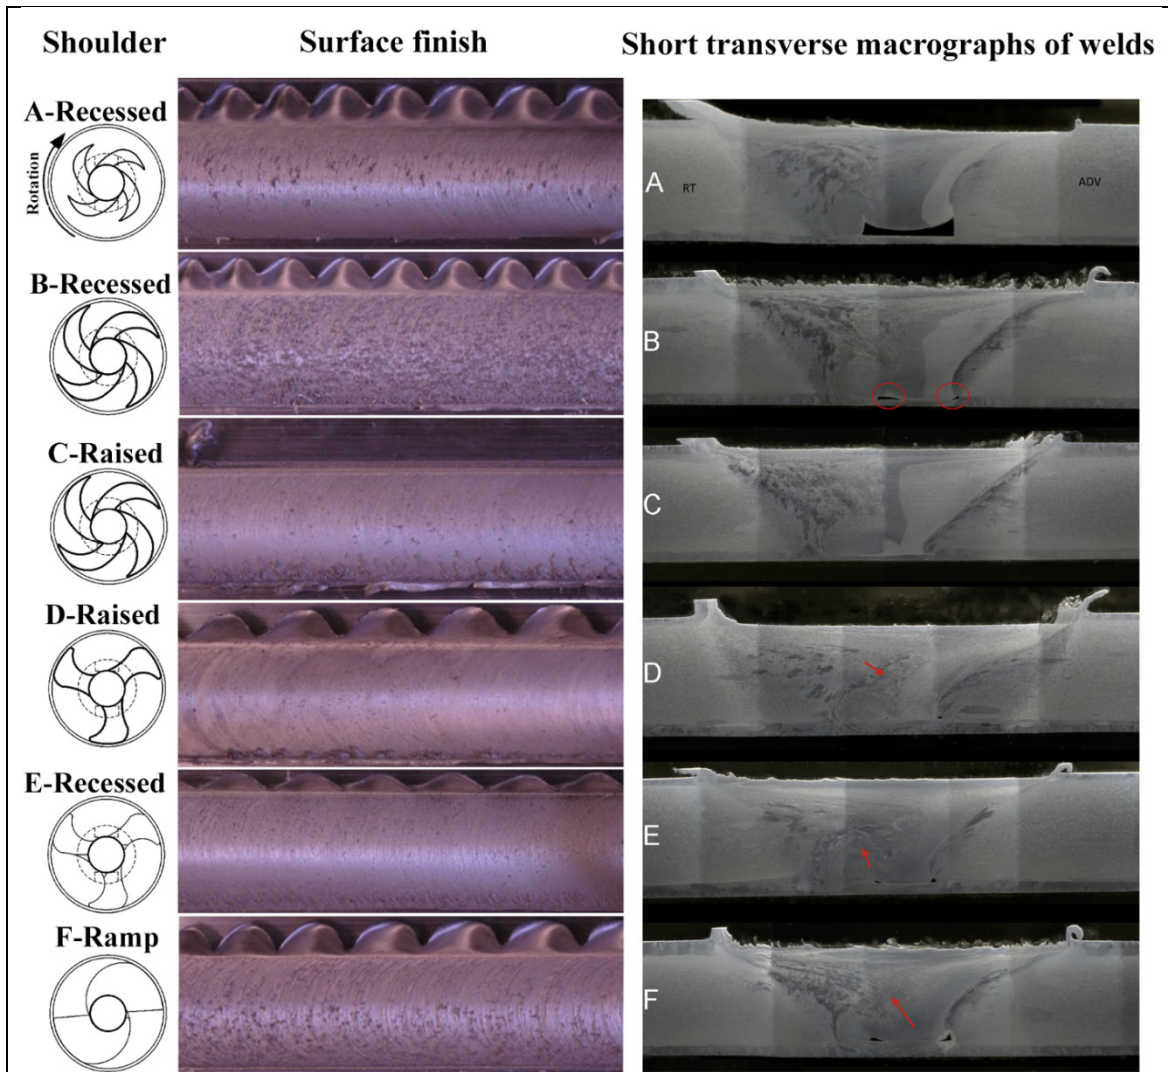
Effect of shoulder designs, resulted finishing surface and weld macrograph (Trueba Jr. et al., 2015)
